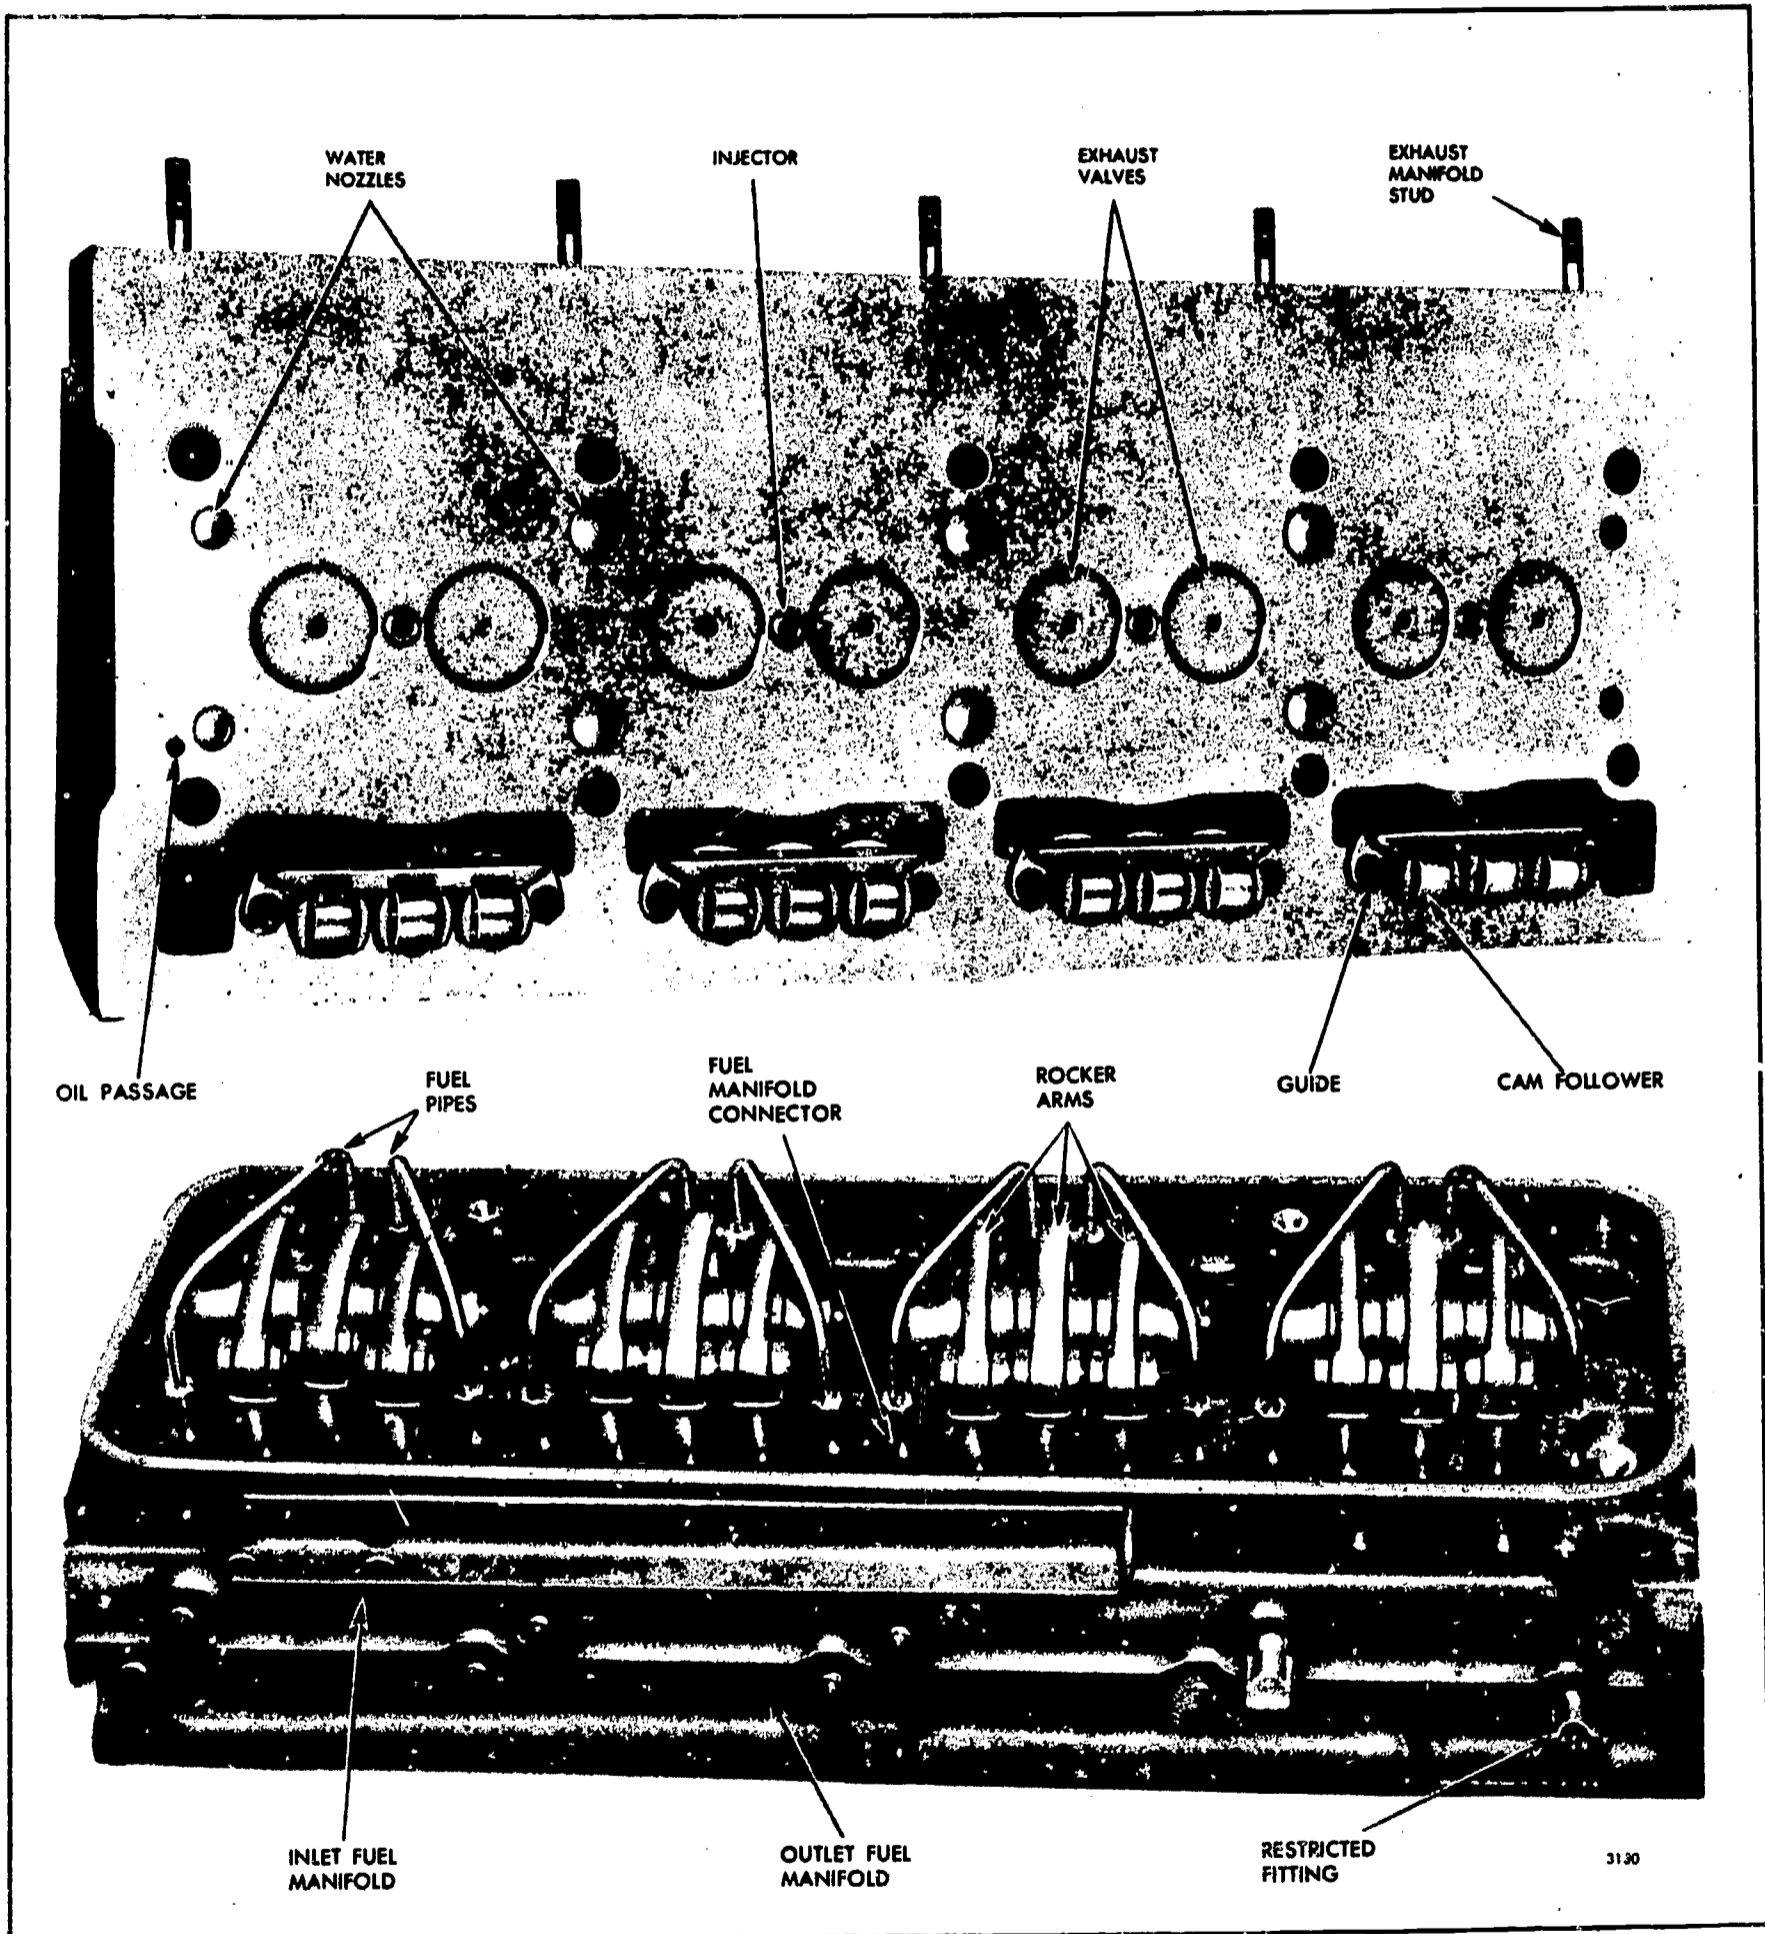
Two valve cylinder head (GM in-line, 4 cycle).
